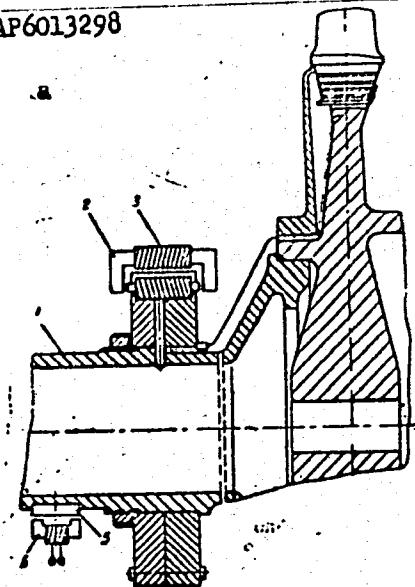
1 - machine shaft; 2 - magnetic connection; 3 - fixed electromagnets; 4 - magnetic screen; 5 - spline-like protrusion; 6 - auxiliary magnet
